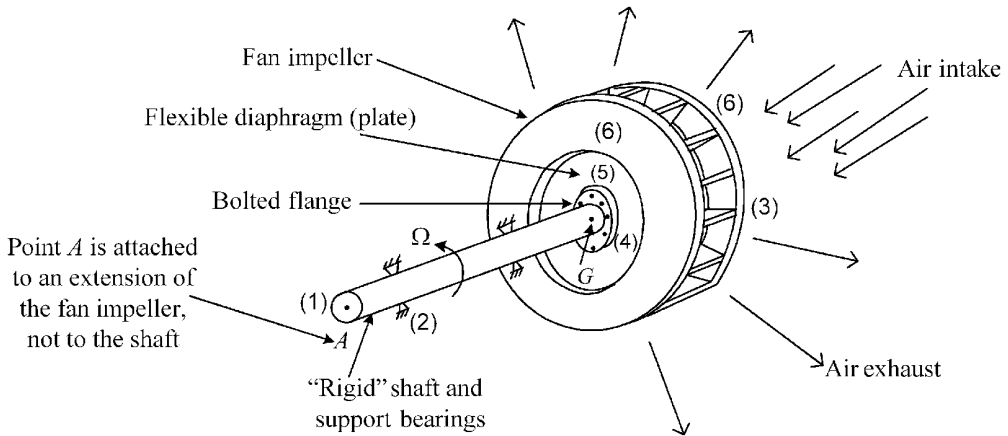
(a) Industrial fan impeller with a flexible diaphragm attachment
